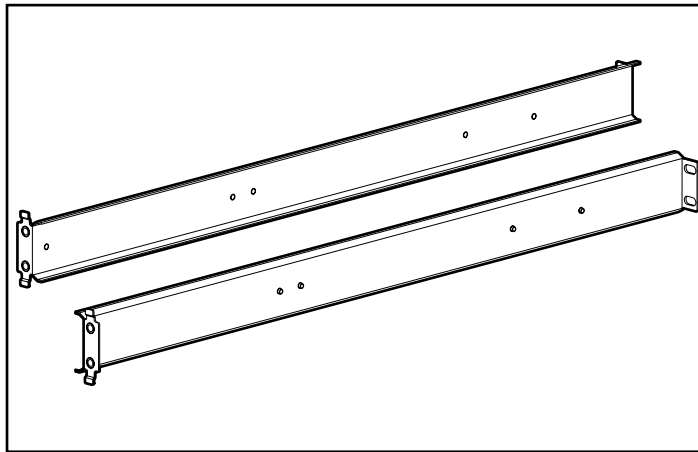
Rack mounting brackets; alignment tabs identify the front flanges
